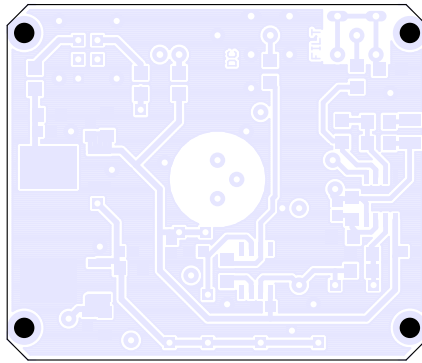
Board bottom view showing drills with 2.7 mm (0.1063 in) diameter
